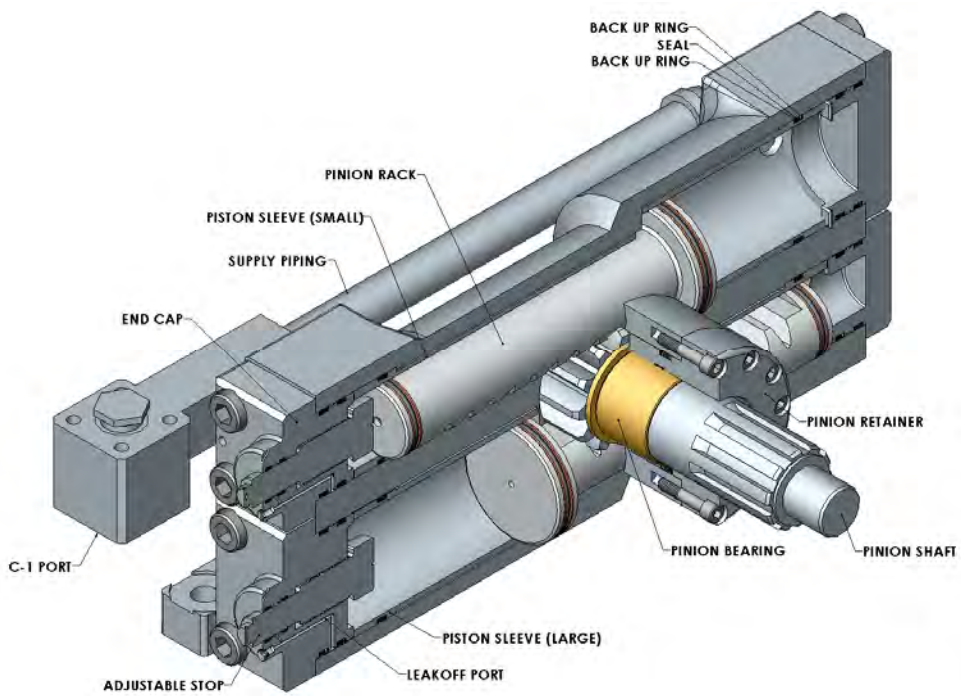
Muzzle Hatch Rotary Actuator (Open Position Shown) (Cutaway)
